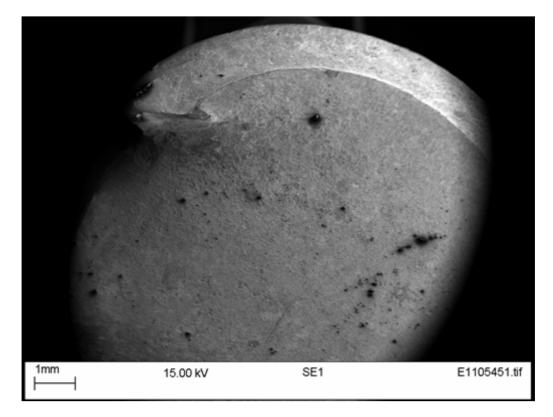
SEM fractograph, showing terminal fracture region of a 45° shear like fracture.
